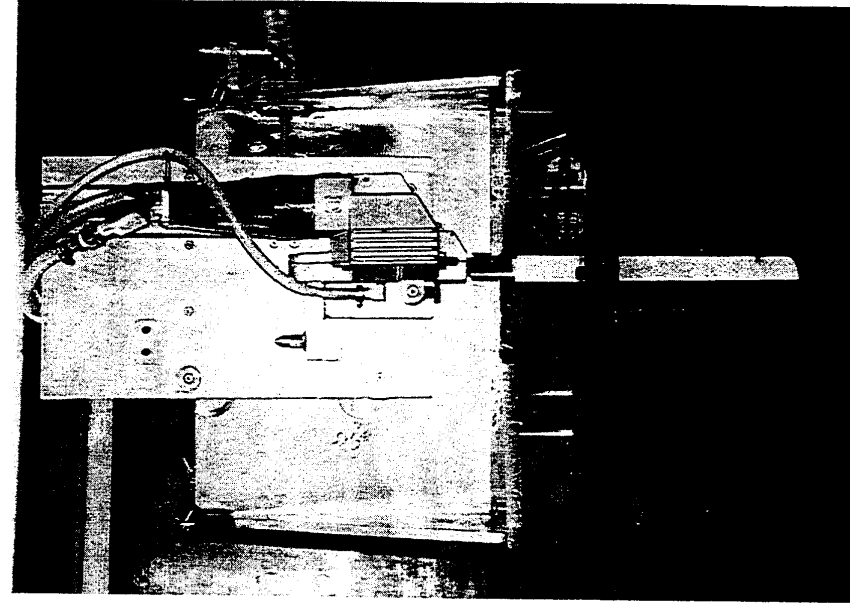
View of the reciprocating saw, installed for cutting penetrating pipes of the collar, during cold trials.
